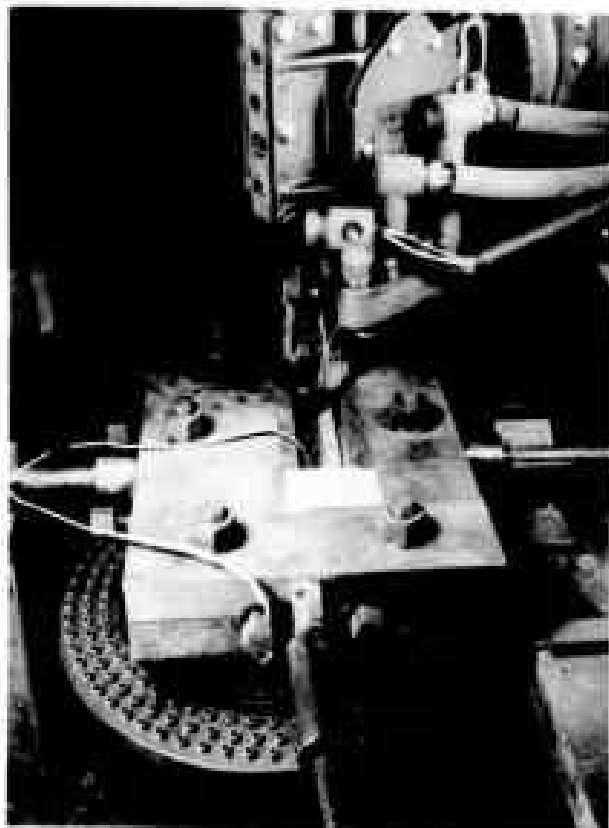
Position of Equipment for Welding Wheel-and-Bucket Design Specimen by the Submerged-Melt Process
